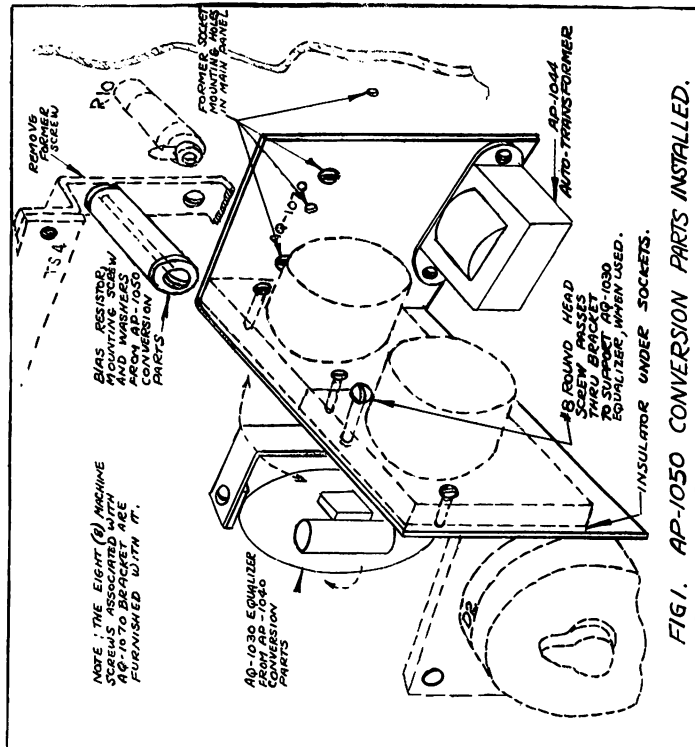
AP-1050 CONVERSION PARTS INSTALLED.
